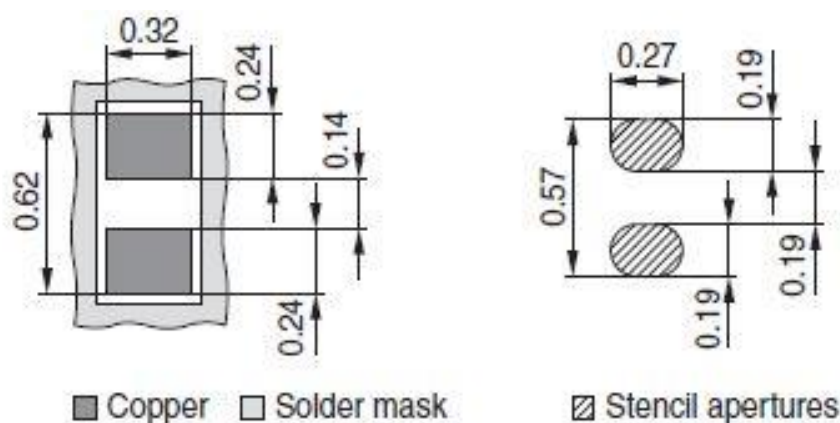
WLL-2-1: Footprint (Dimension in mm)
